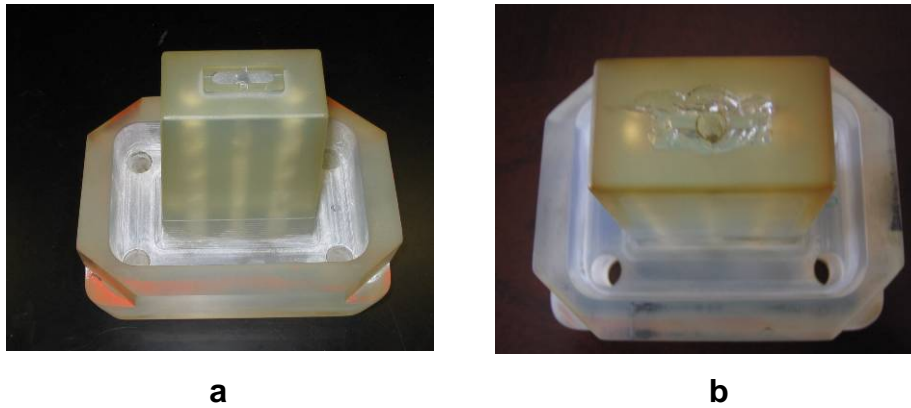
Runner system of the Somos 11120 resin core moulding blocks: a) before injections, b) after injections
